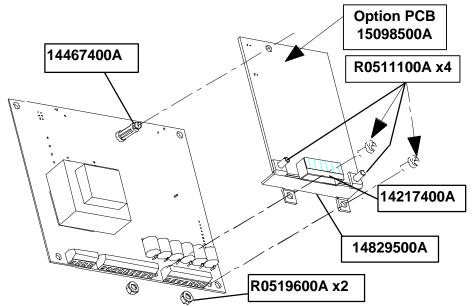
Allen-Bradley PCB Installation in Panel Mount Enclosure
